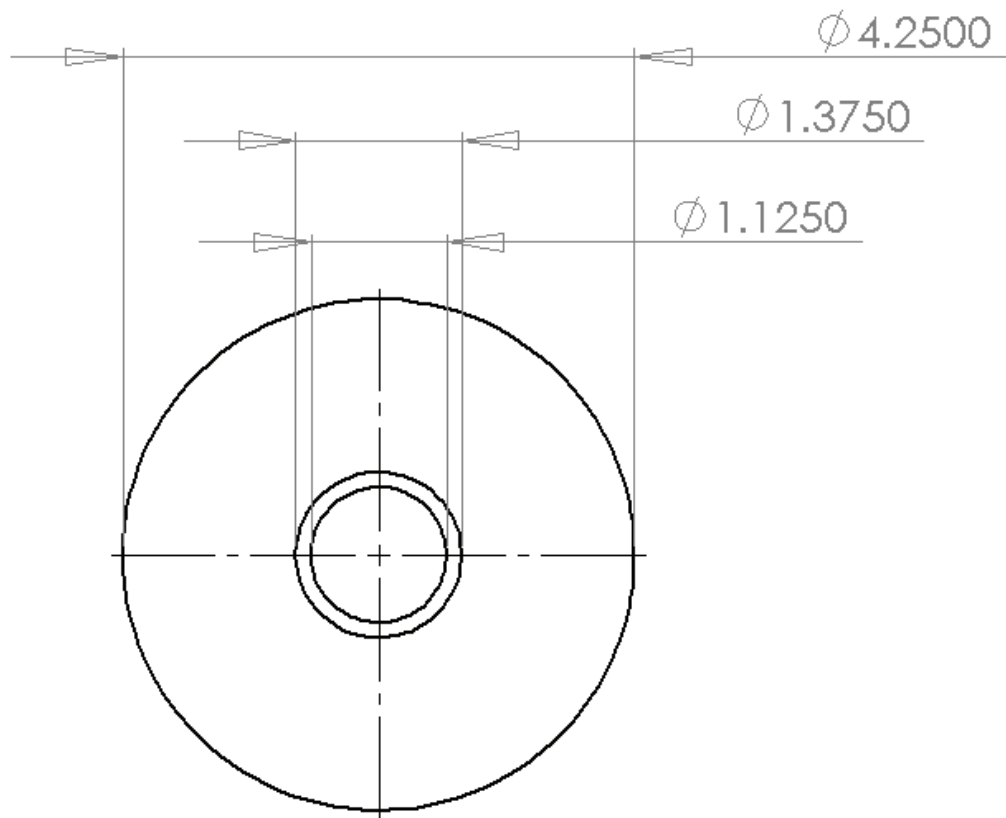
Mechanical drawing of the outside face of the part *right dummy hub.sld
